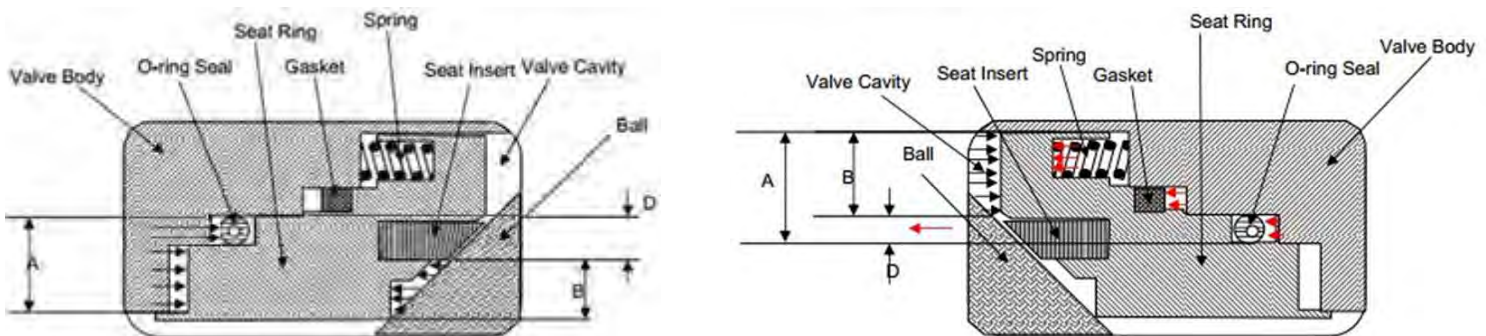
DPE seat assembly mechanism (illustration on a soft ball valve)
